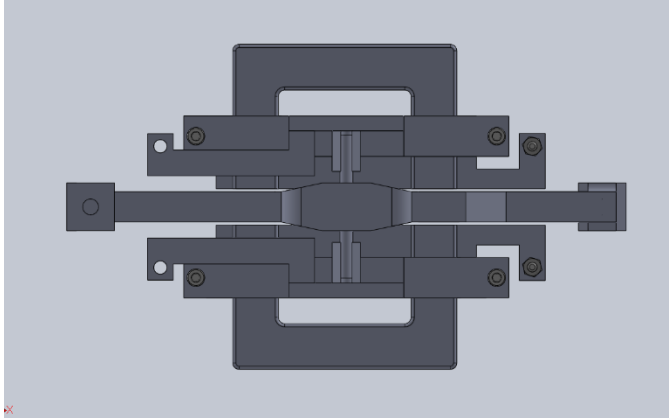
Top View of SolidWorks Model of Previous Motor Assembly
